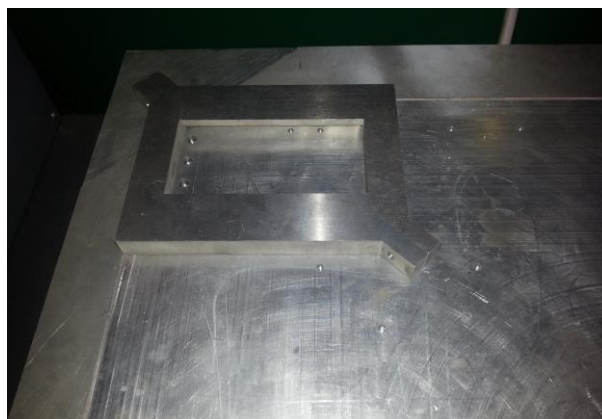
Manufactured cooling base with recess on top surface and casting-frame in position
